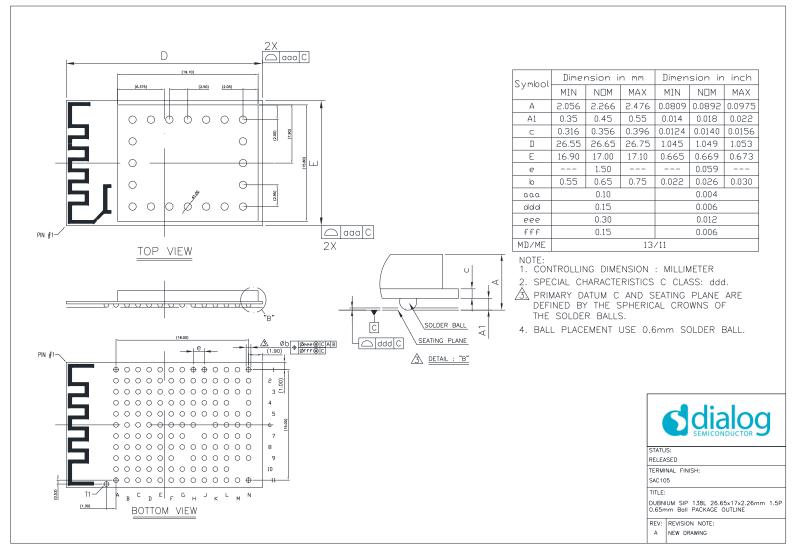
DA14AVDDECT BGA Package Outline Drawing
